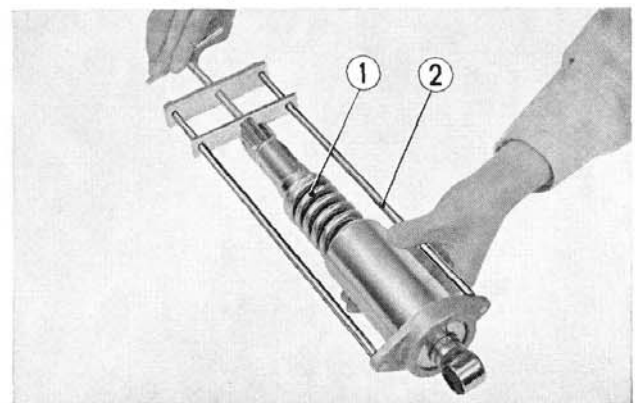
① Rear cushion spring ② Rear cushion disassembling tool
